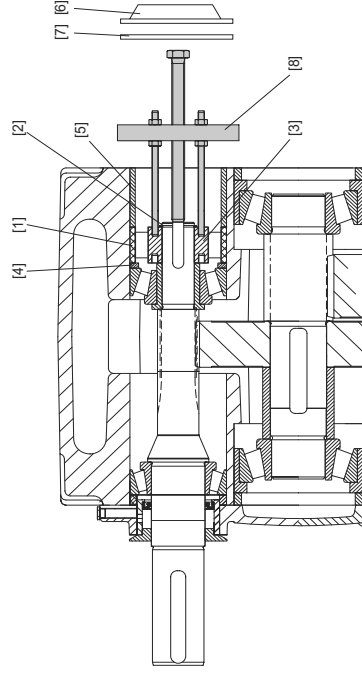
Changing the direction of rotation with backstop mounted inside the gear unit
